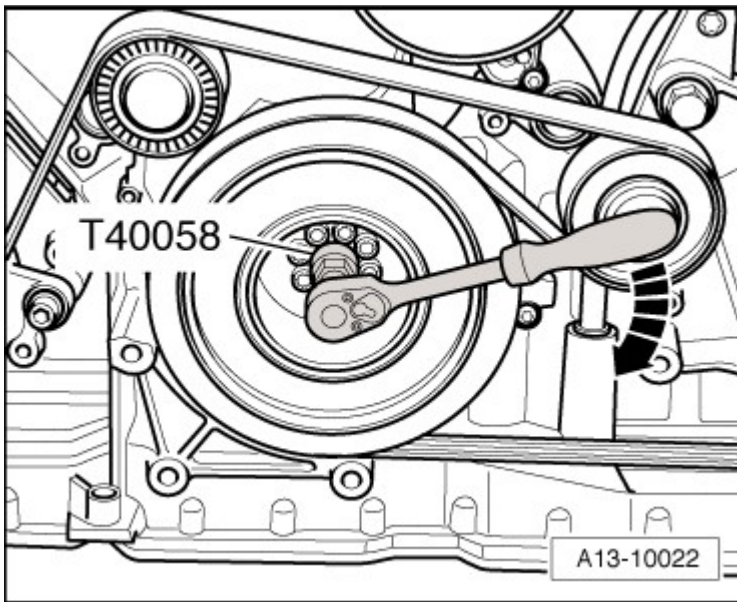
Identifying TDC With Special Tool Adapter T40058
